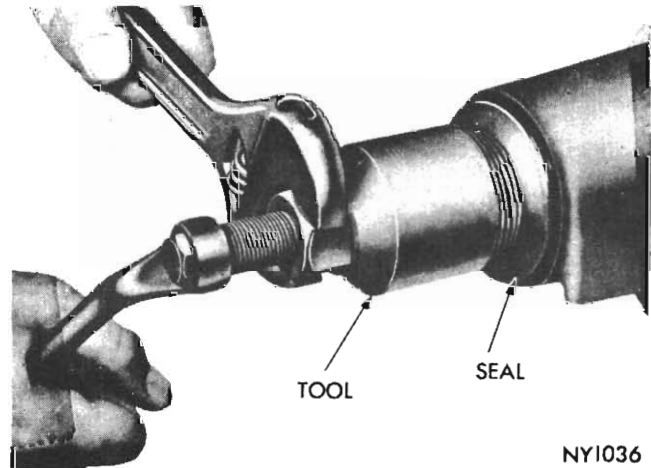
Removing pinion oil seal (Tool E3C10C)
